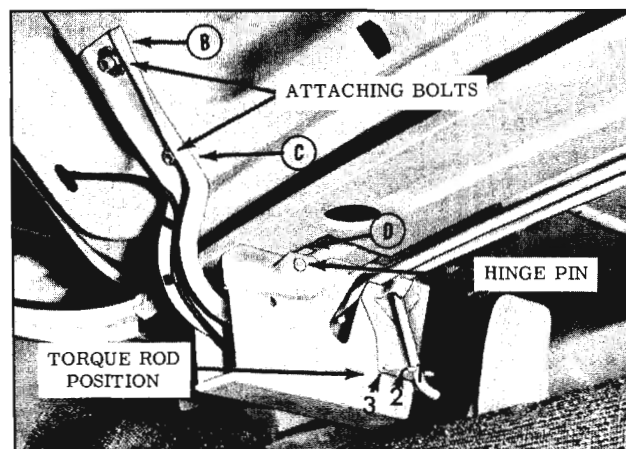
Rear Compartment Hinge and Torque Rod
